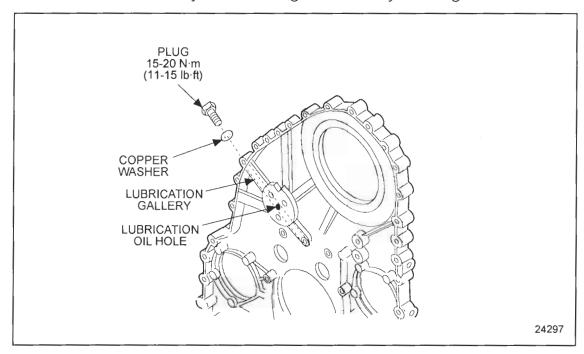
Adjustable Idler Gear Lubrication Gallery
